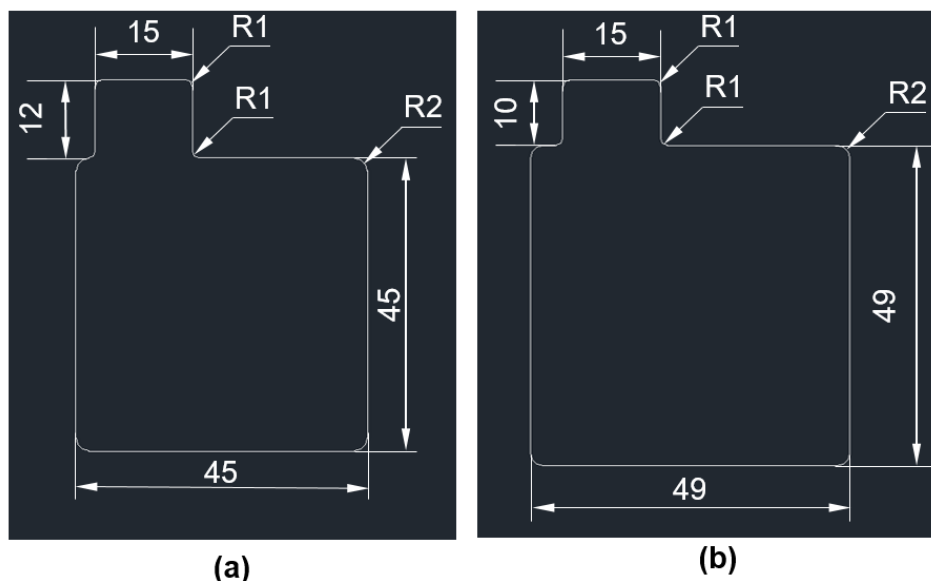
The technical drawing of electrode dimensions for (a) cathode and (b) anode.
